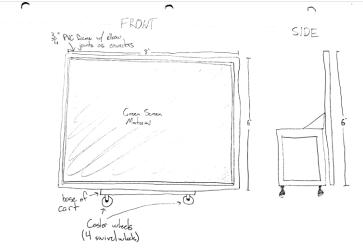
Drawing of The Stand Still. (Drawing by Liam Dooley).
